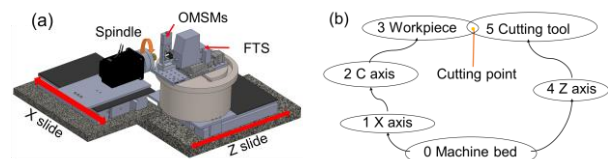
(a) XZC type ultra-precision machine tool and (b) topological structure
